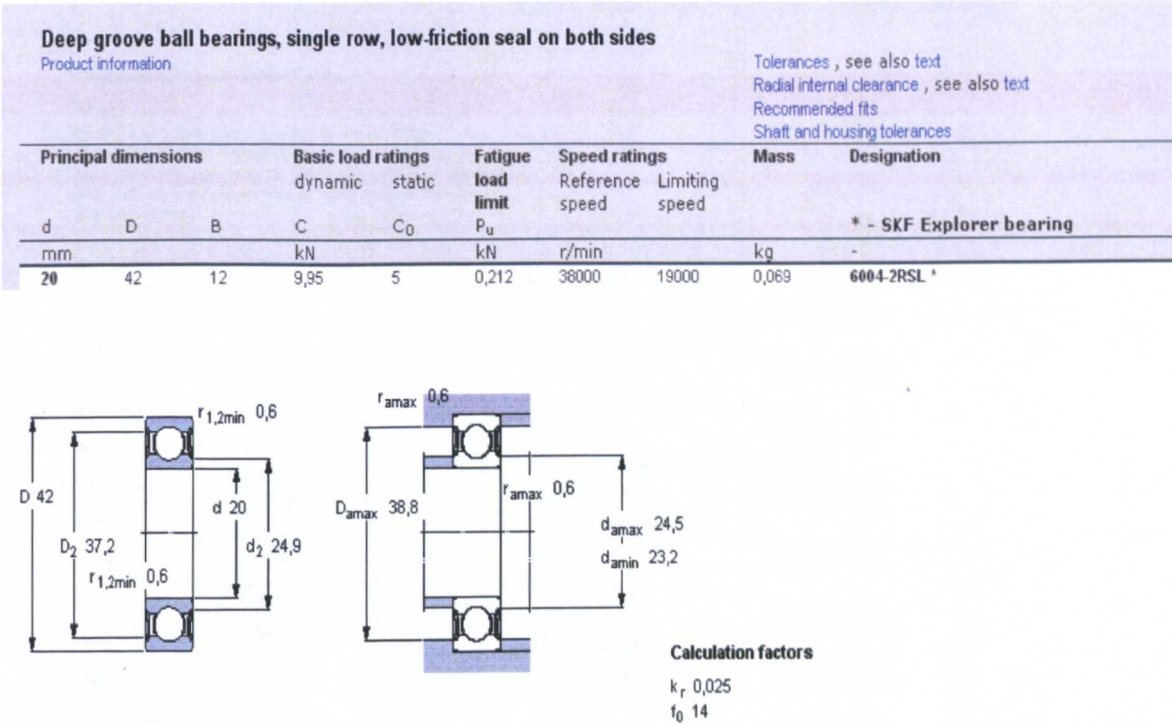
Datasheet of bearings used for the prototyped motor (6004-2RSL)
